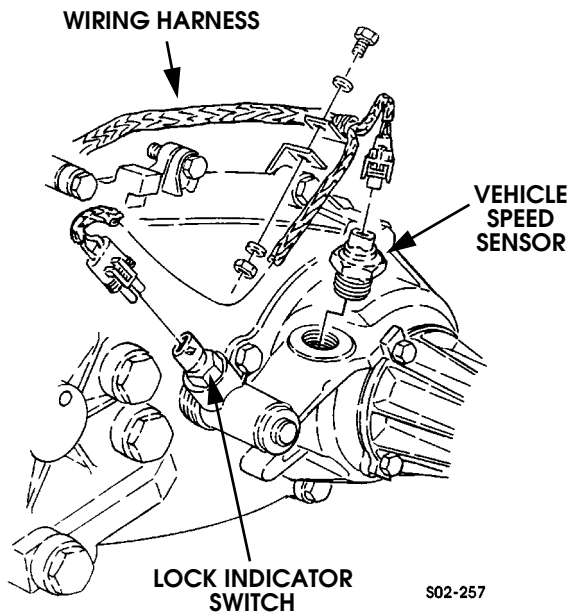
Speed Sensor and Lock Indicator Switch Location
